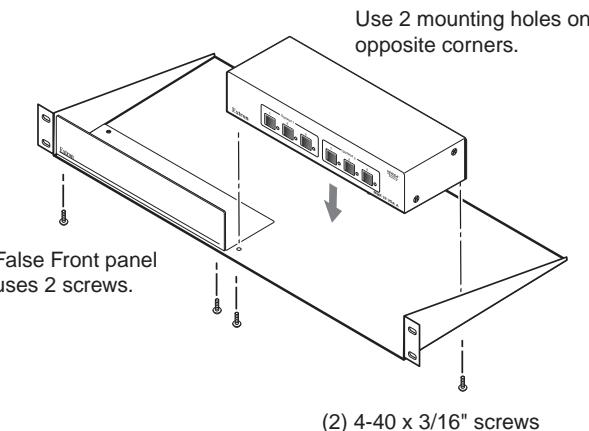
Mounting the MMX 32 VGA A on a 1U Universal rack shelf
